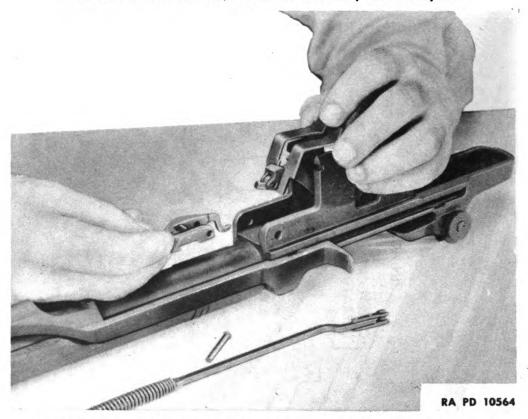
Disassembling Bullet Guide and Operating Rod Catch from Receiver
